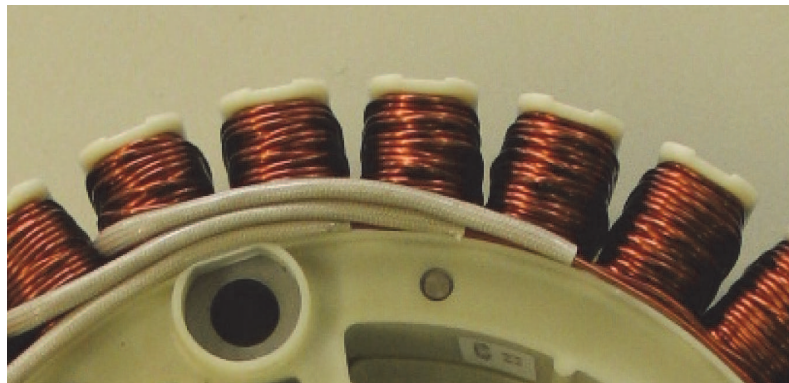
Detail of the stator with the concentrated coil windings.
